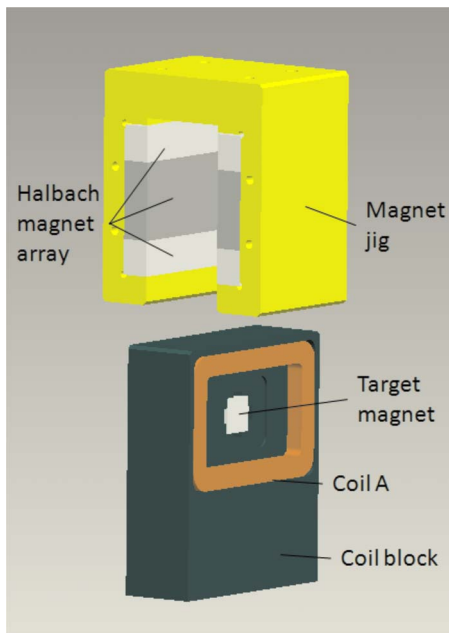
(Color online) Exploded view of HLAMB prototype. Halbach magnet arrays, which are assembled in the magnet jig, are a mover and the coil block is a stator.
